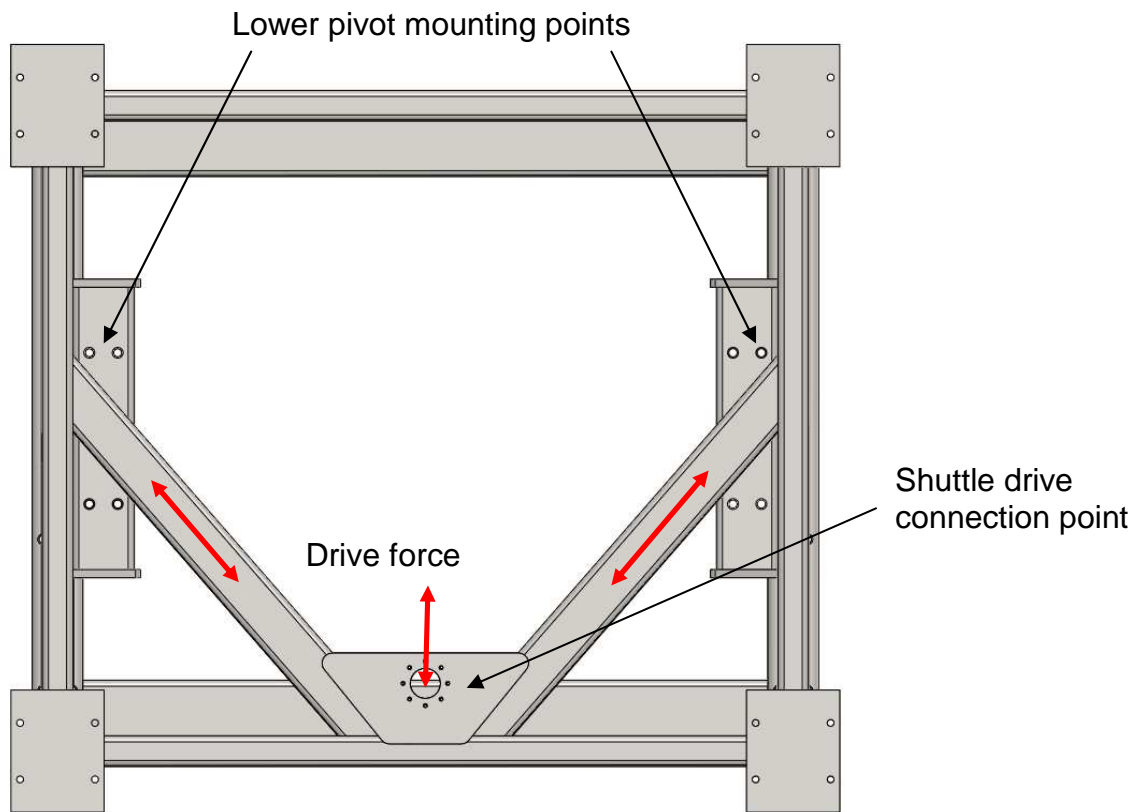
Base of the shuttle frame indicating the bracing to transfer drive forces directly to the blade material
